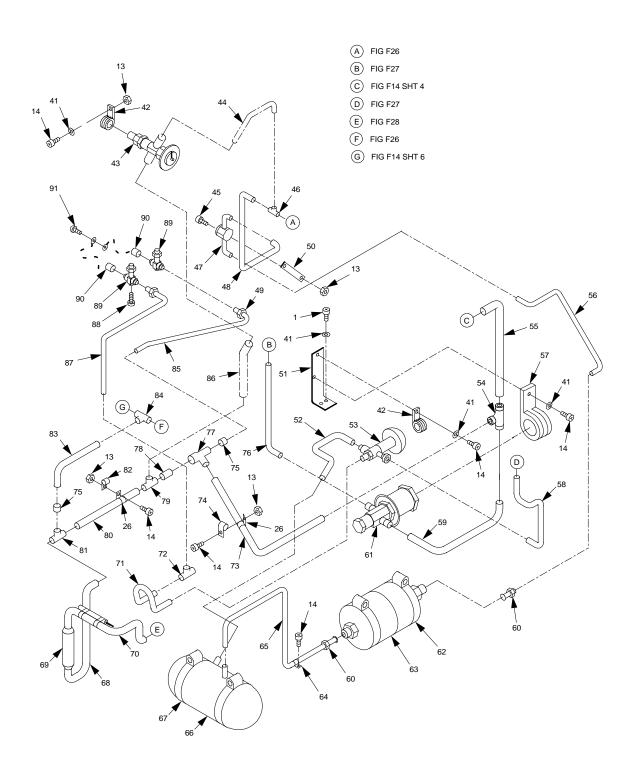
Condenser Assembly (Sheet 5 of 6)
